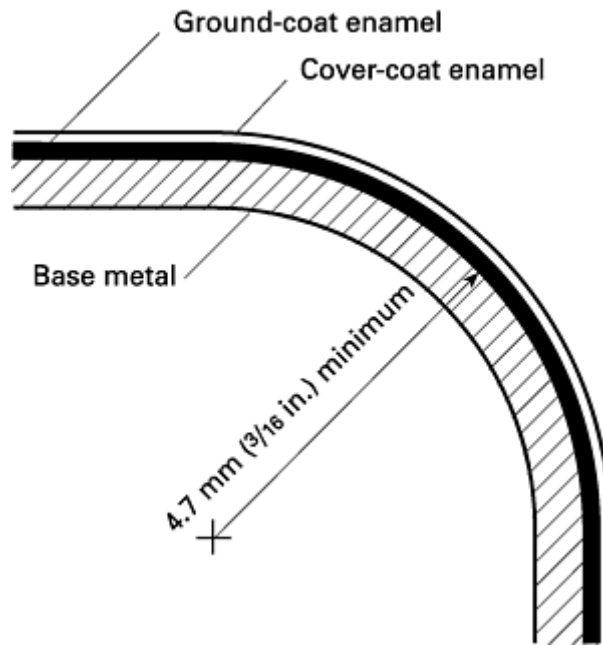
Radius of curvature, two-coat enameling process. A minimum radius of 4.8 mm ($\frac{3}{16}$ in.) must be maintained at flanges, corners, and embossments to minimize assembly and field damage to parts coated by the two-coat enameling process.
